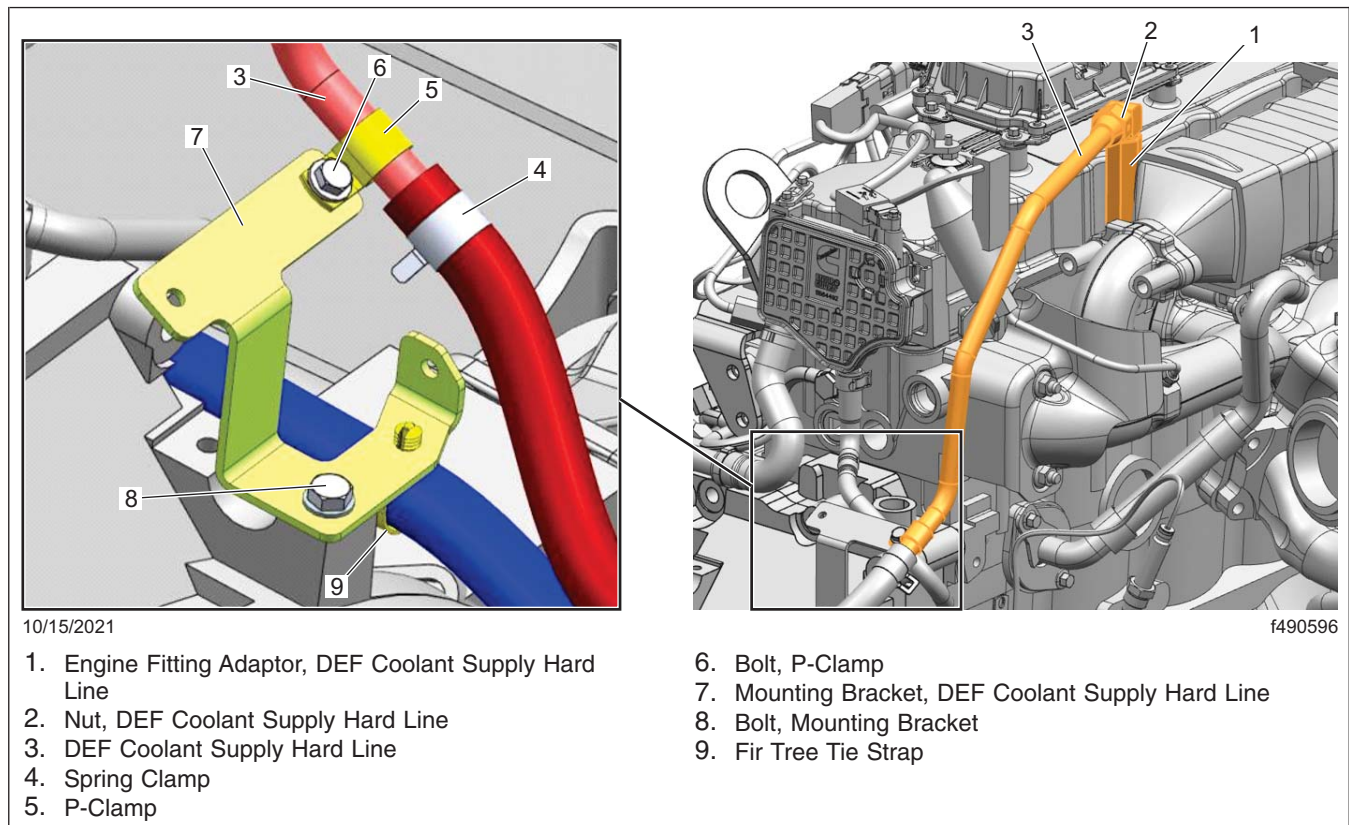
, Mounting, Existing DEF Coolant Supply Hard Line
